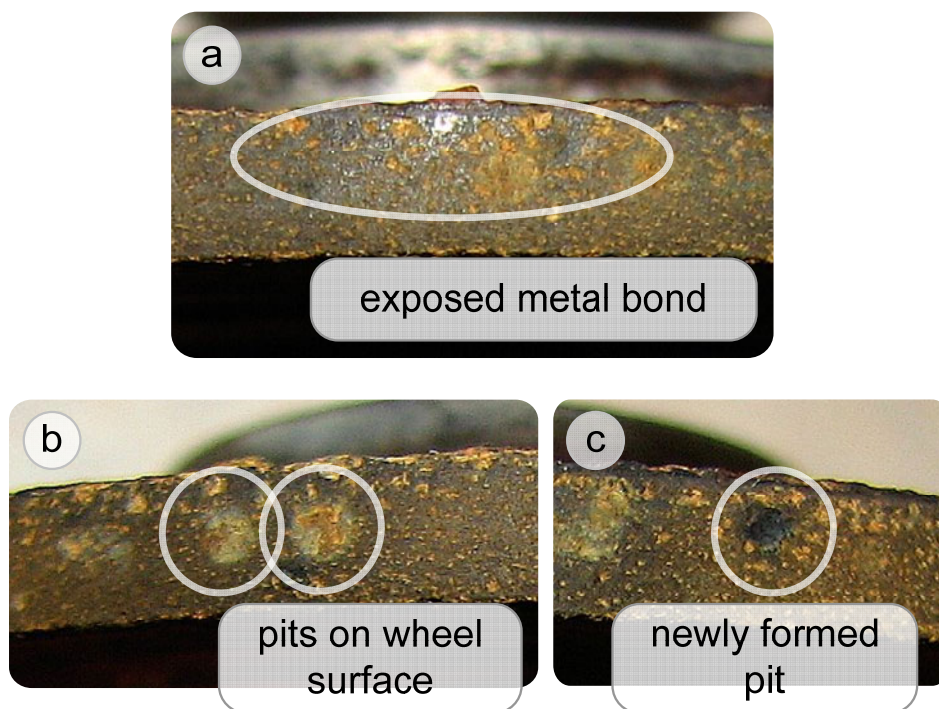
Macroscopic view of #1200 grit size grinding wheel surface immediately after steady state grinding insufficient dressing
